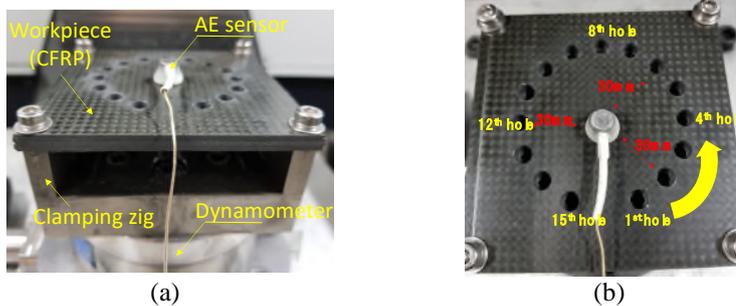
Experimental setup. Clamping zig, dynamometer, and AE signal for measuring cutting signals (a) and position of 15 machined holes (b).
